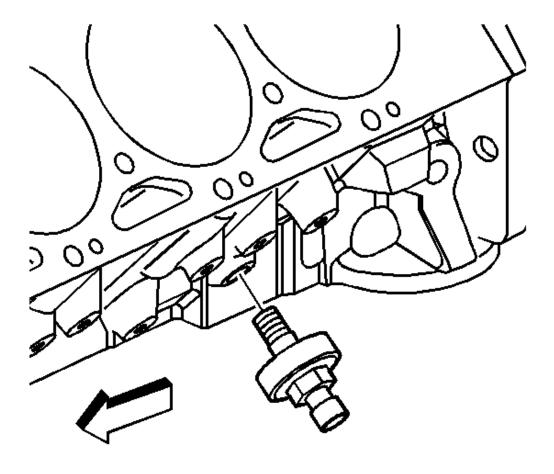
View Of Left Side Knock Sensor Courtesy of GENERAL MOTORS CORP.
